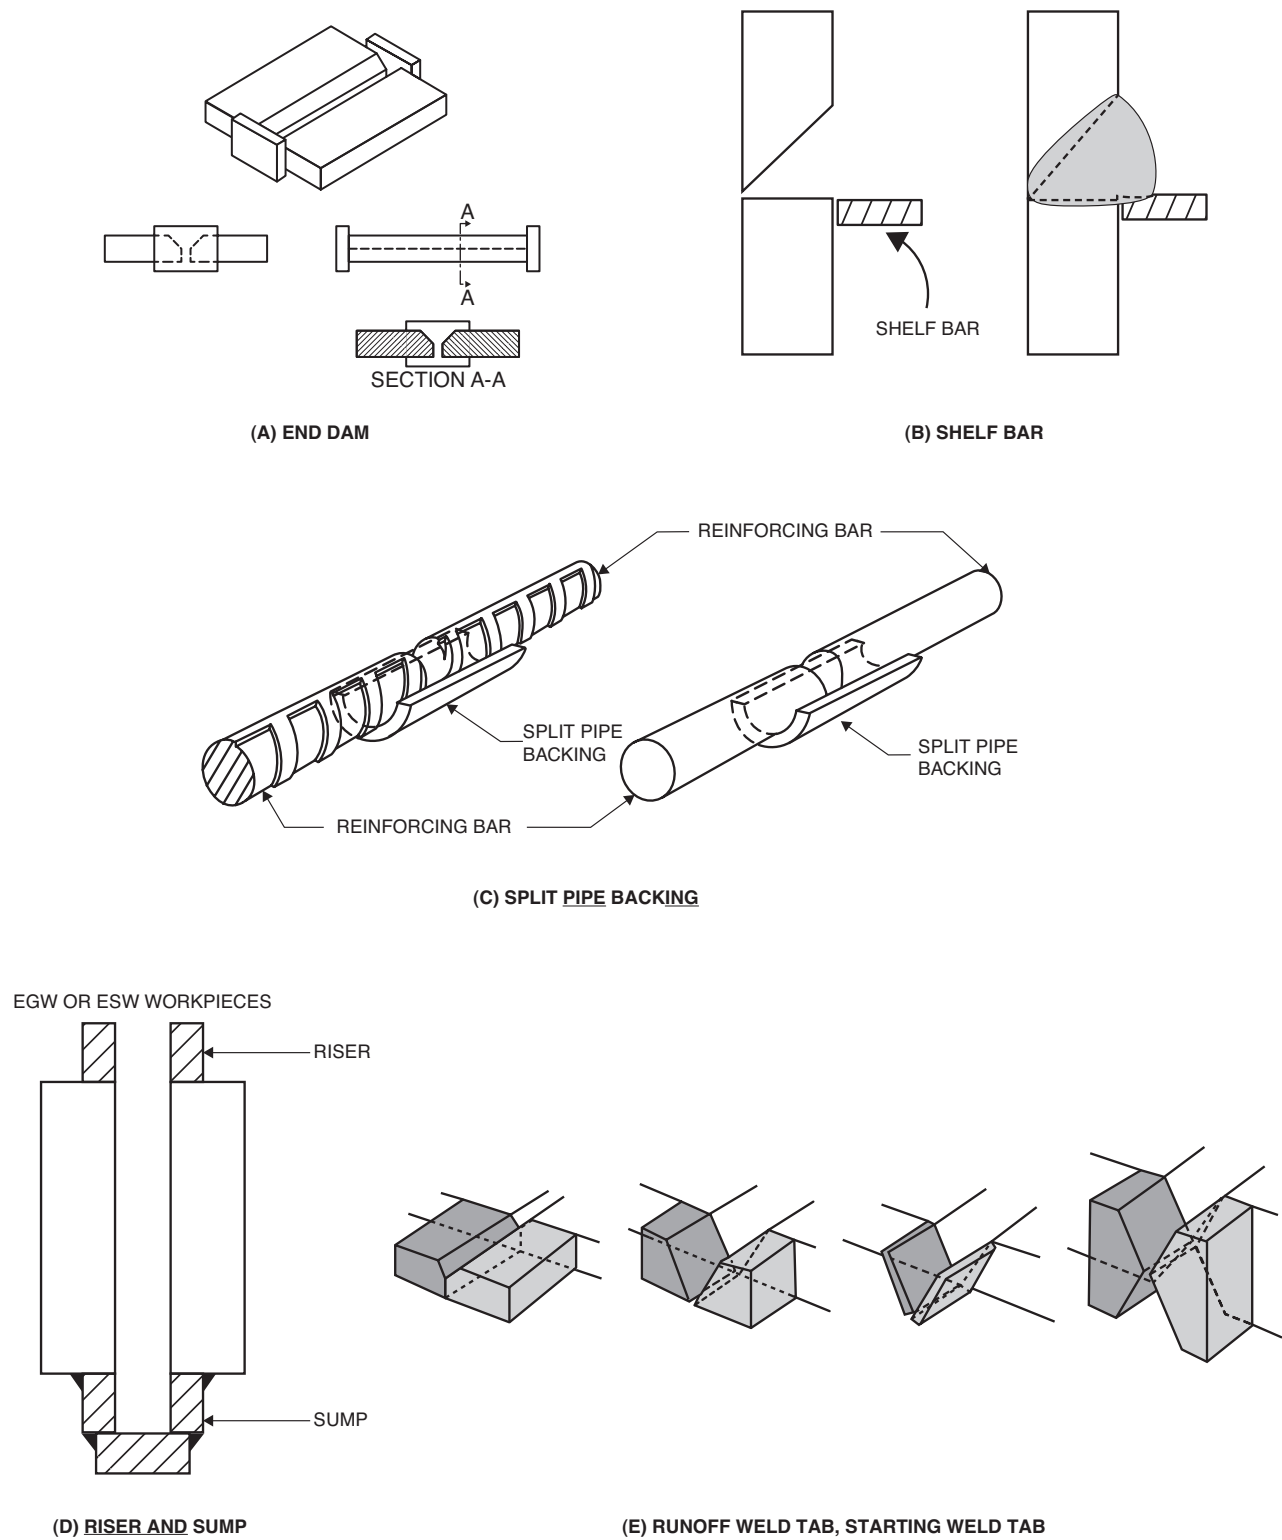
End Dam, Shelf, Split Pipe Backing, Riser, Sump, Starting Weld Tab, and Runoff Tab
